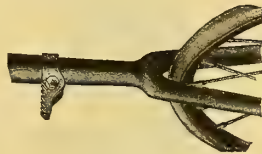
REAR FORK, SHOWING ADJUSTABLE AND DETACHABLE STEP.
